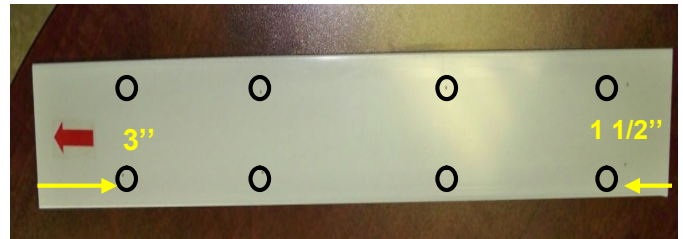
Exterior part with marked holes (First punch mark at 3" towards the corner molding side.) (First punch mark at 1 1/2" on the extrusion side)
